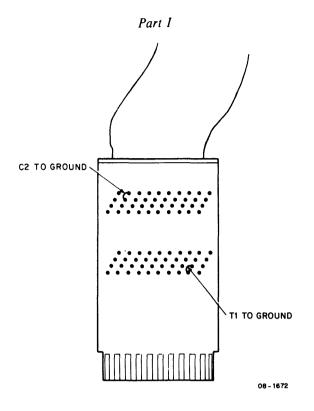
Paddle Board Jumpers on Side 2 of Cable Assembly 7011571
